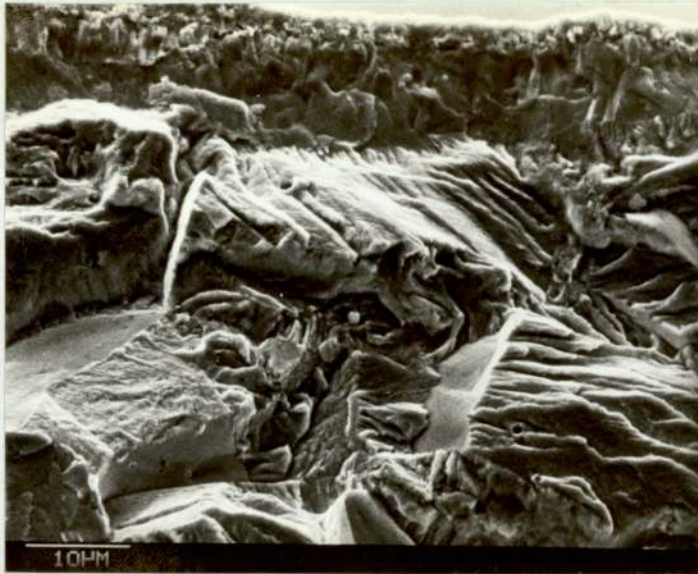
Fatigue fracture in nitrocarburised
